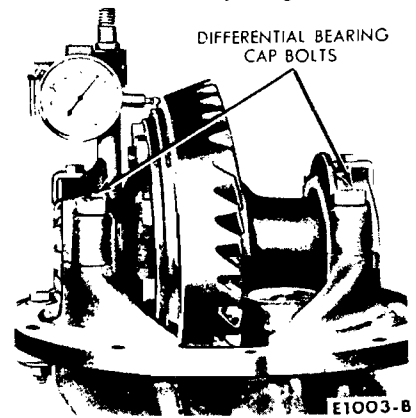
Checking Ring Gear Runout—Removable Carrier Type Axle
